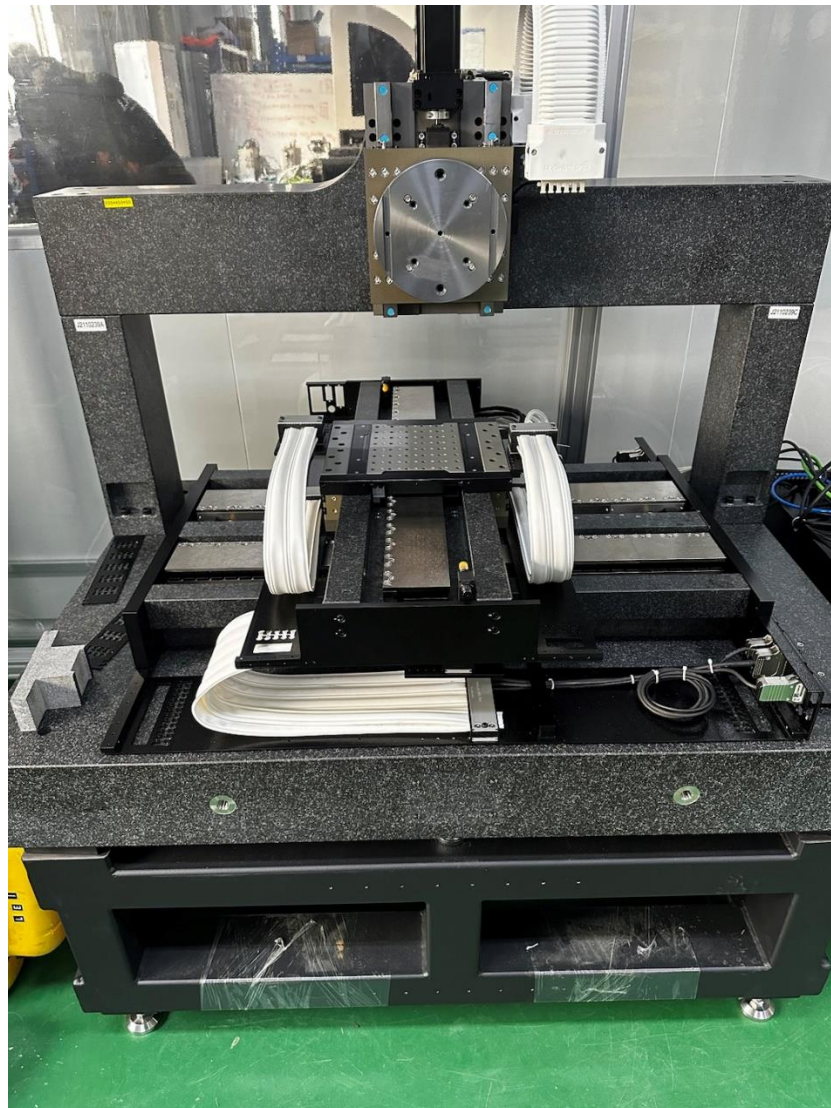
Assembled UPM machine platform with extra Z-axis
